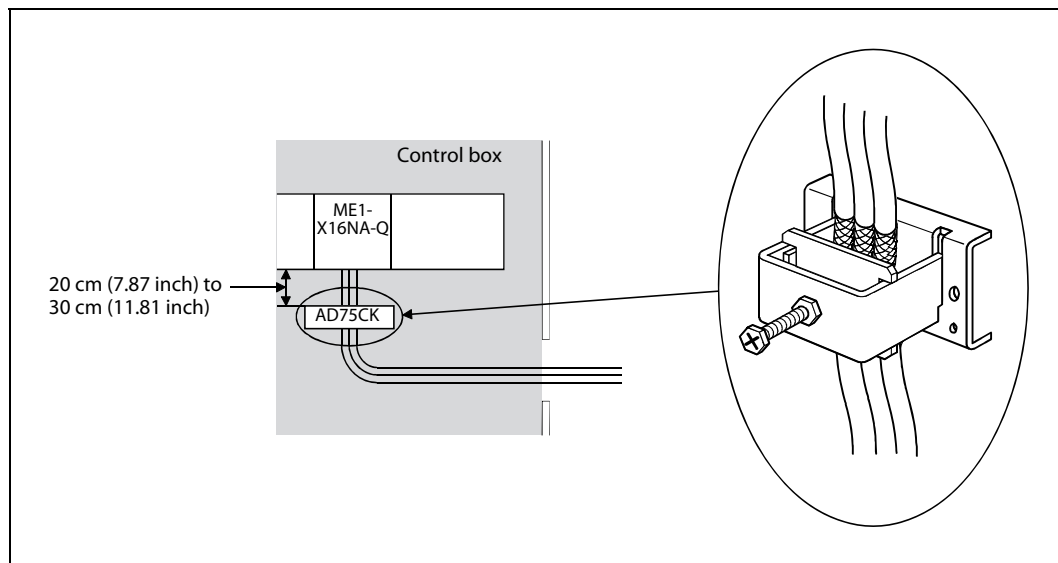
Grounding of a shielded cable using a AD75CK cable clamp
